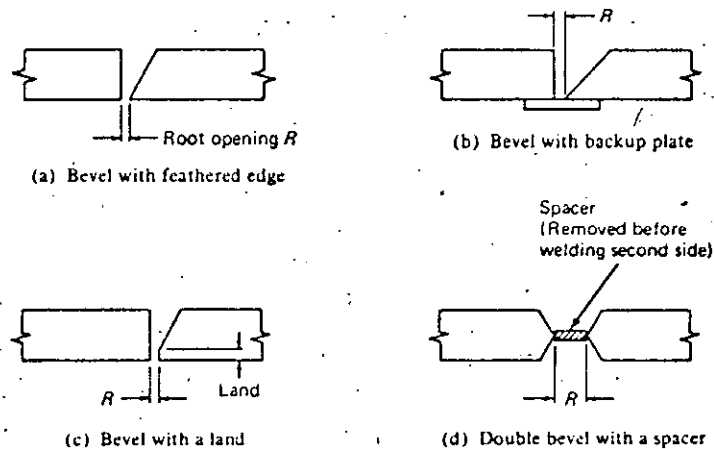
Typical edge preparations for groove welds.
